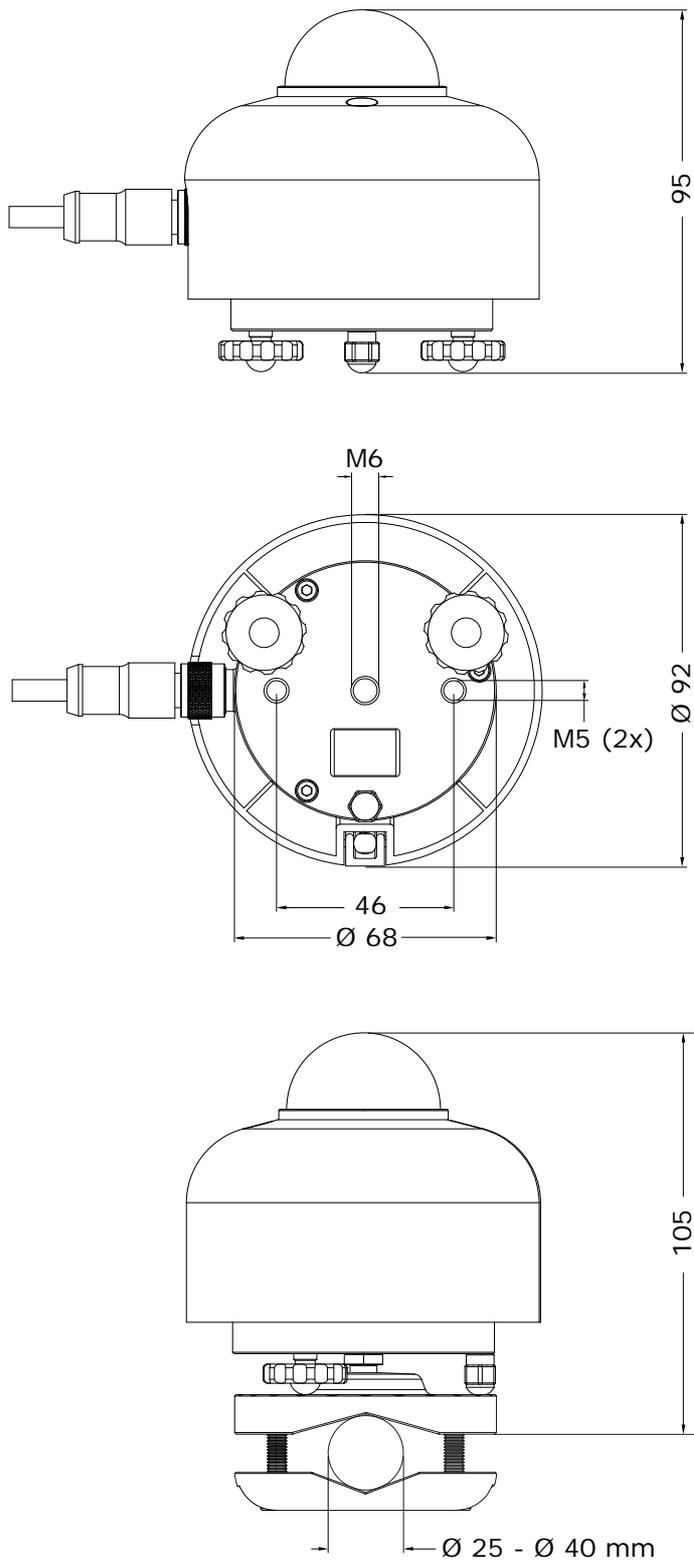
Dimensions of SR30 in $\times 10^{-3}$ m. Mounts are optional
